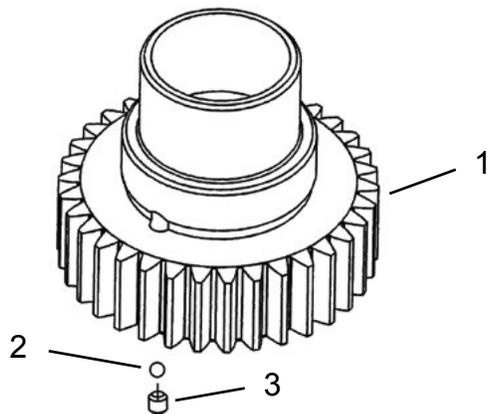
642486PT-XX Spindle Feed Gear - MITIS
